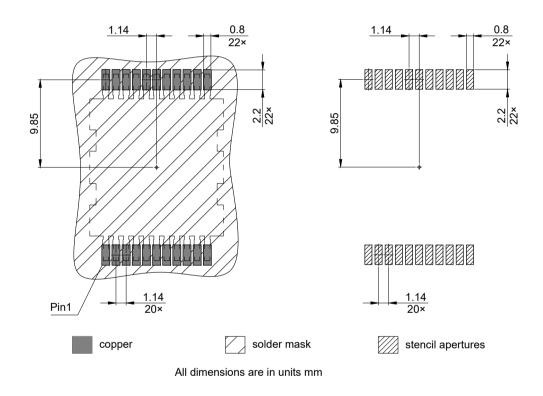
Footprint drawing PG-HDSOP-22, dimensions in mm
